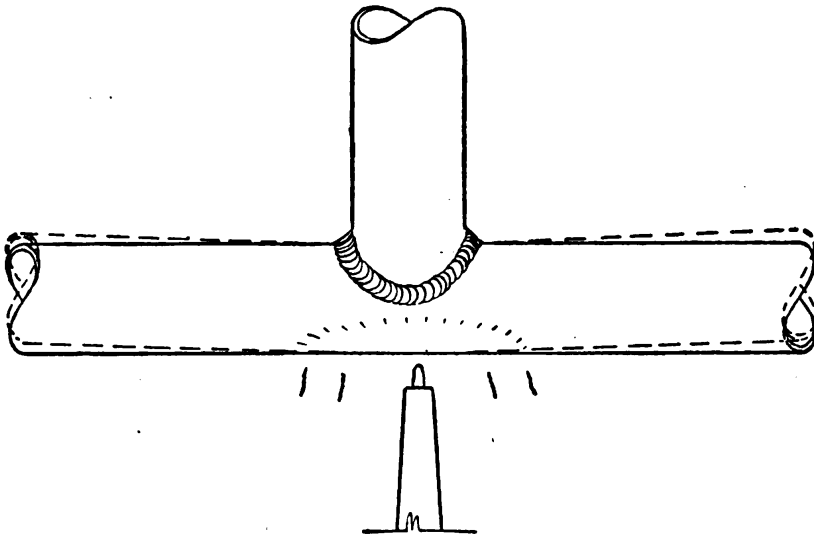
Methods of providing for expansion in the welding of castings.
